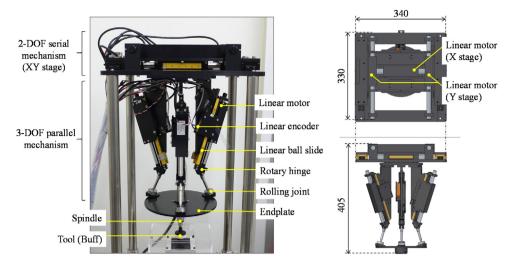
Schematic of the serial-parallel mechanism polishing machine.
